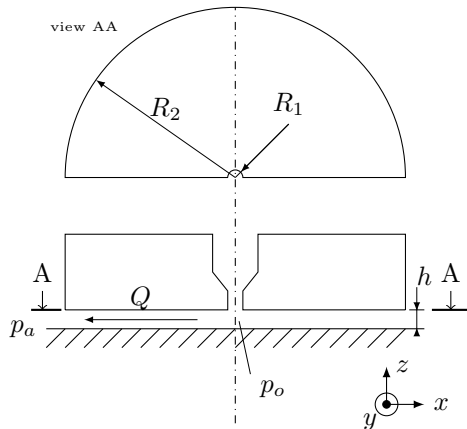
Schematic drawing of a hydrostatic thrust bearing.
